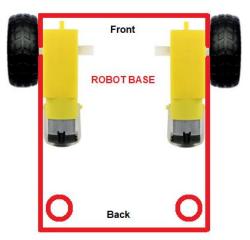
DC-GEARED MOTOR TO CHASSIS (TYPE B)
